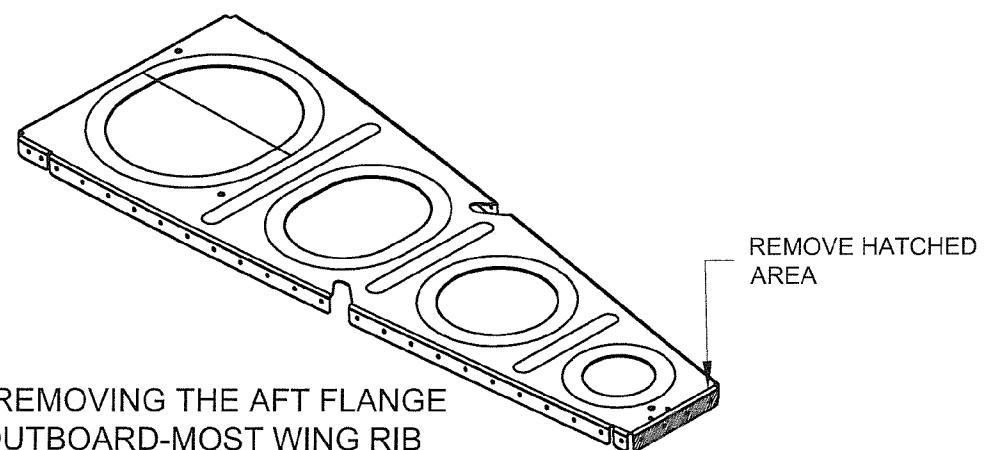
REMOVING THE AFT FLANGE OF THE OUTBOARD-MOST WING RIB
